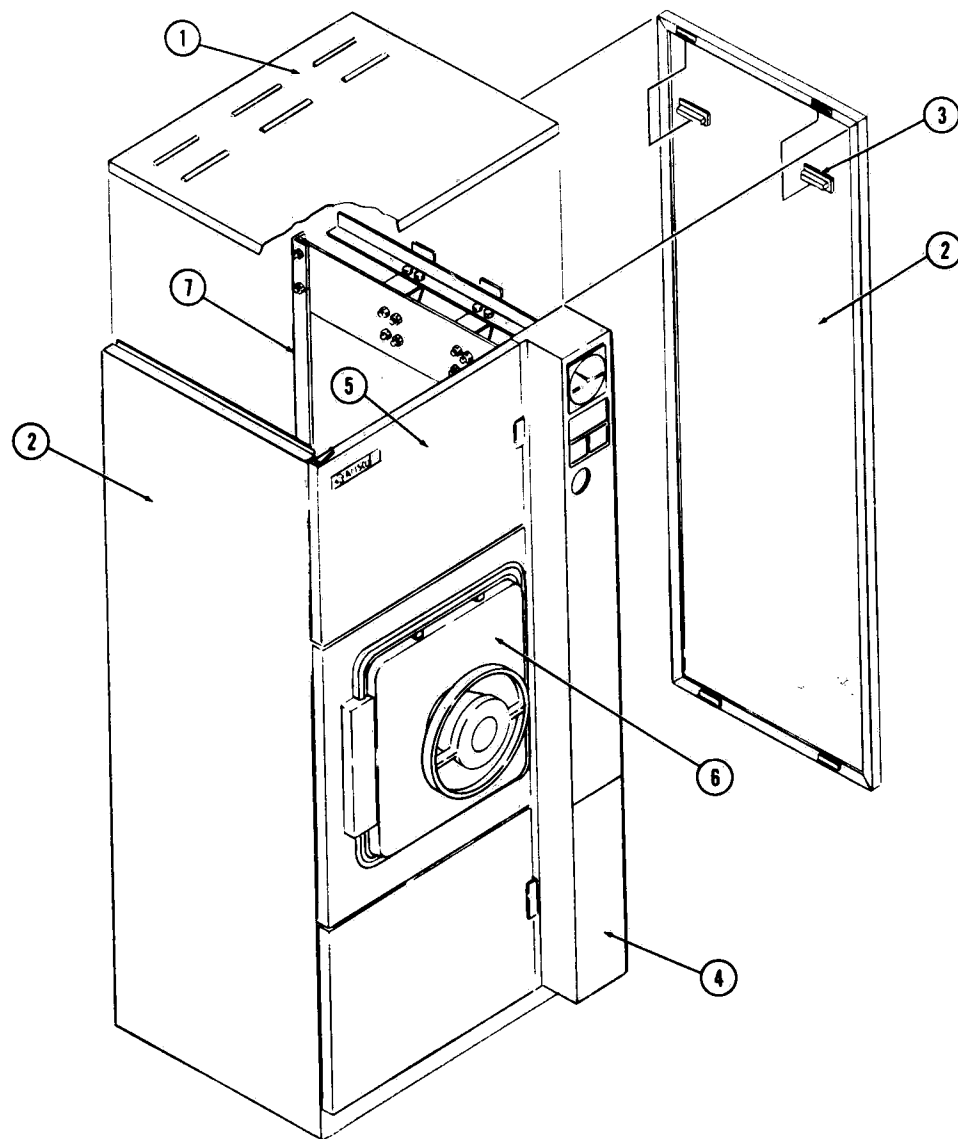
CABINET ASSEMBLY: Freestanding Sterilizer.
